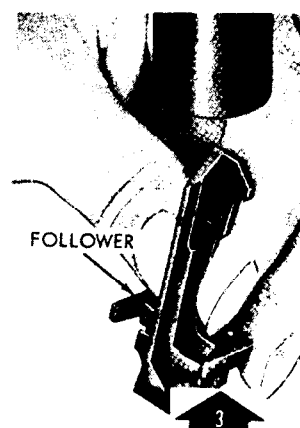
Disassembly/assembly of follower group. (1 of 2)
